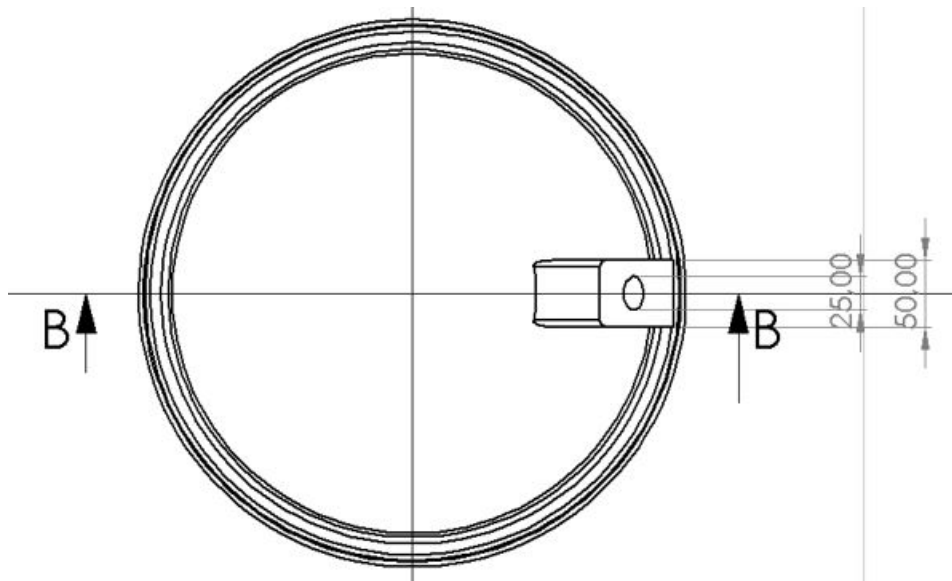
Top view drawings of the dome design. With cross-section BB in figure B.7.20. Dimensions in micrometres [μm].
